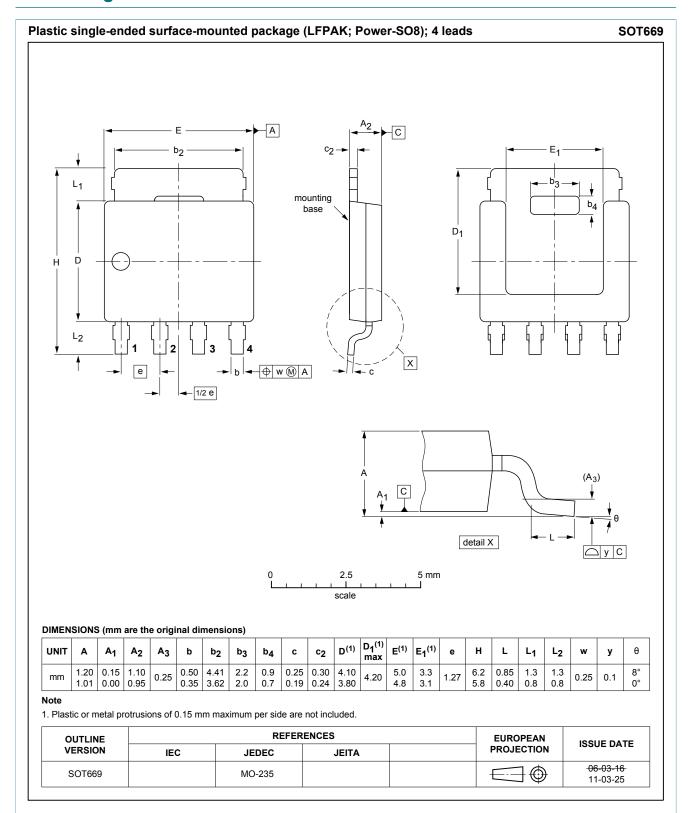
Package outline LFPAK; Power-SO8 (SOT669)
